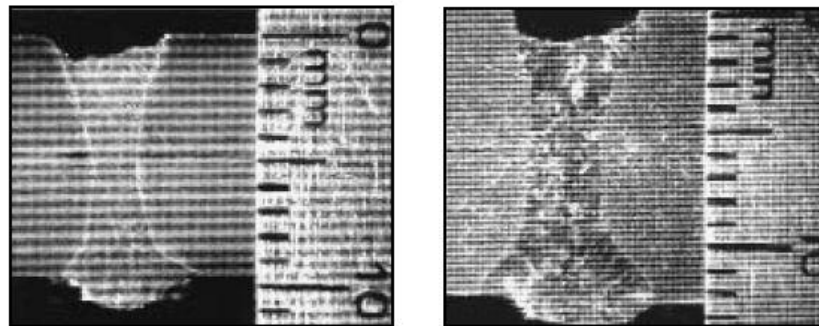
Keyhole double-sided arc butt joint weld traveling at 80 mm/min with 70 A on a (right) 12.7 mm thick plate welding upwards (left) 9.5 mm thick plate welding flat [17]
